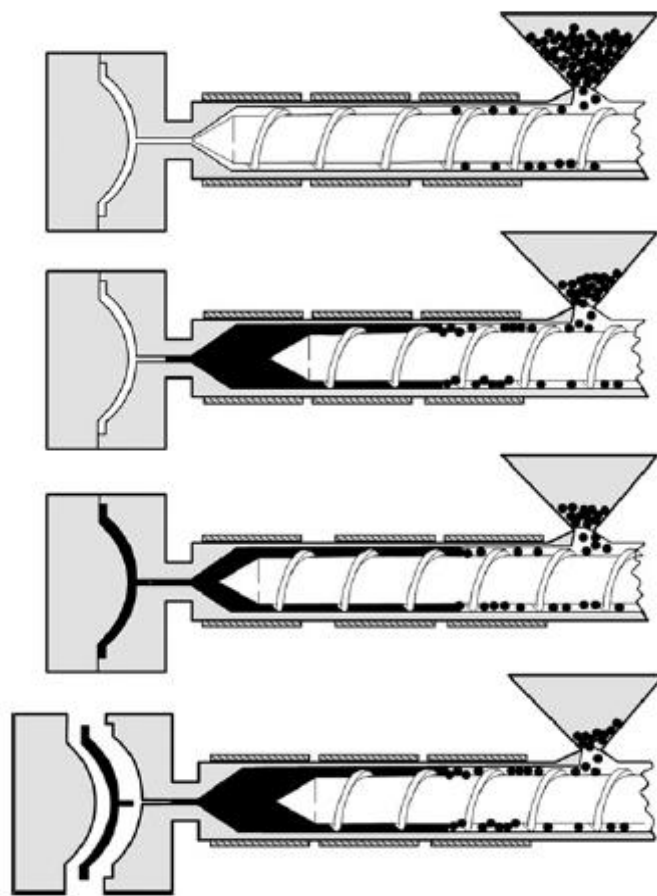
Schematic view of screw-type injection molding (IM) process [29]
